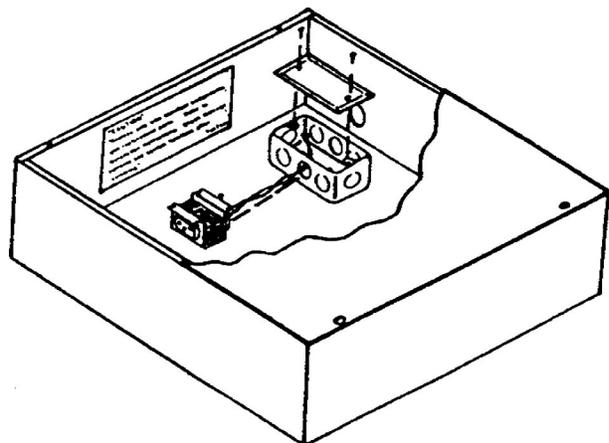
Master Panel Housing Chart and Wall Cut-Out Details
